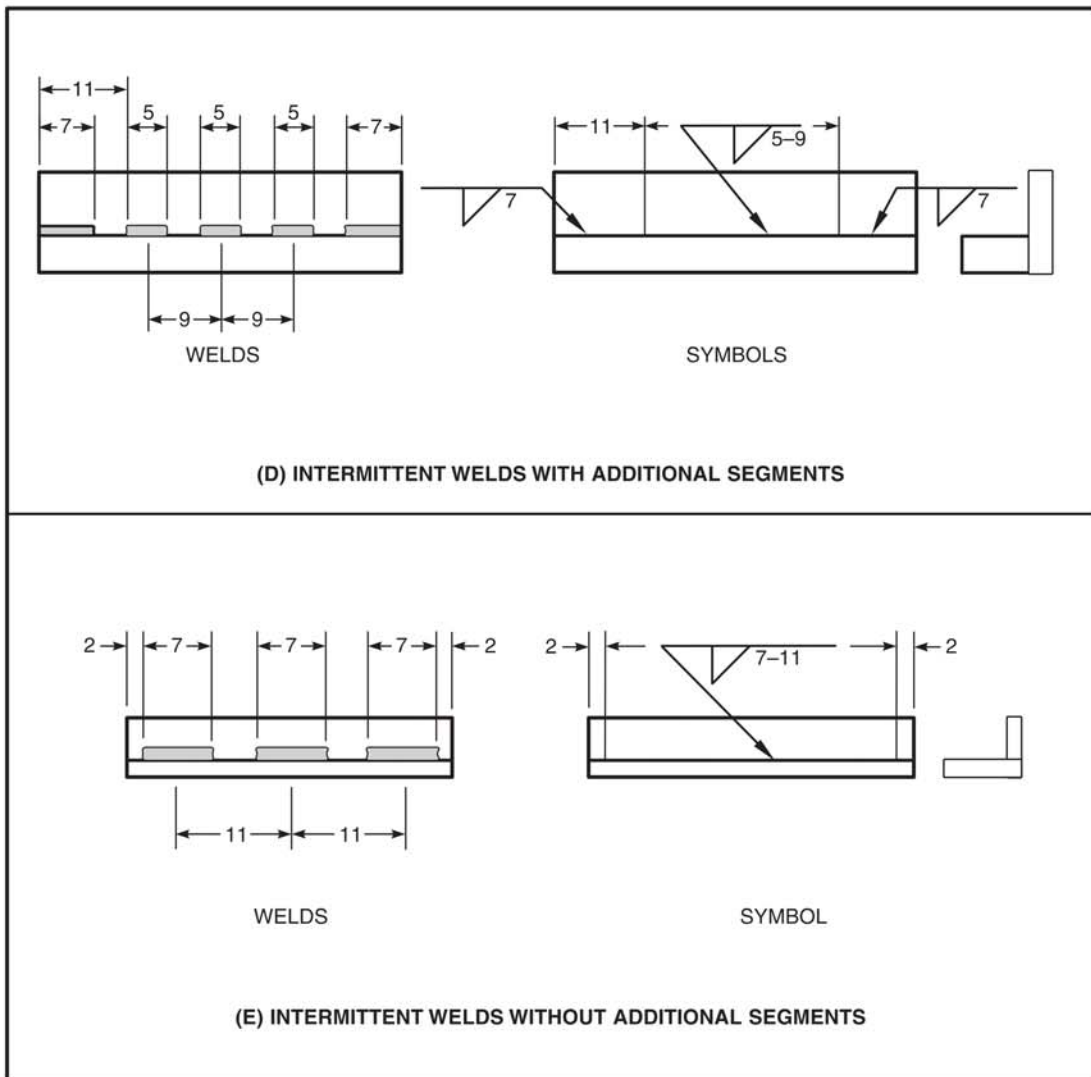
(Continued)—Application of the Intermittent Fillet Weld Symbol
